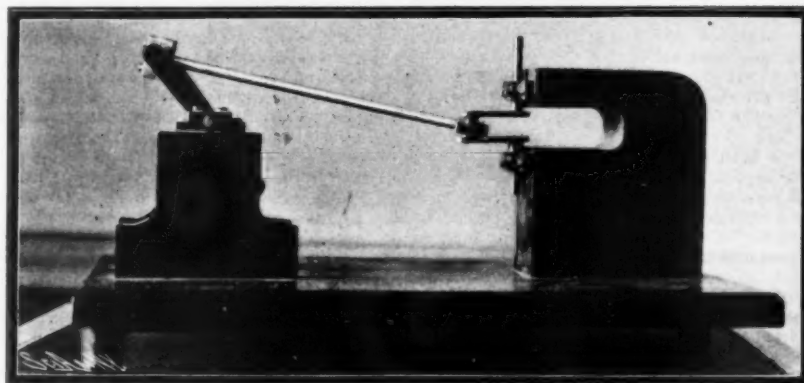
FOUR-PIECE MECHANISM SHOWING ARRANGEMENT OF SHAFTS.
